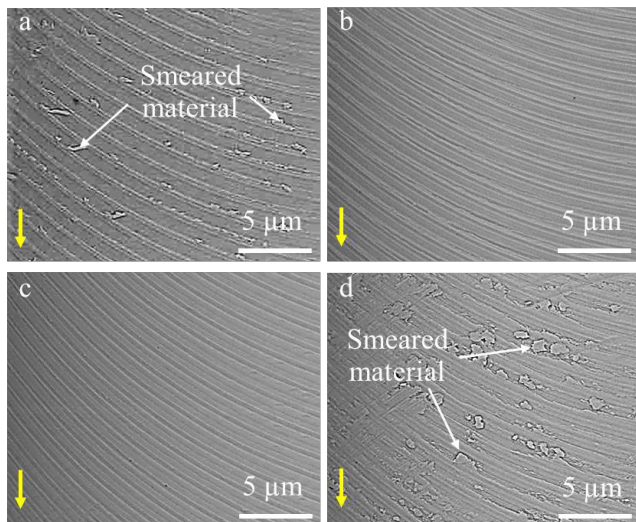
SEM images of typical defects of the machined surfaces: NT sample machined // (a) and \perp to the LSD (b), and SAT sample machined // (c) and \perp to the LSD (d) (f_z 0.007 mm/tooth). The yellow arrows indicate the tool feed direction.
